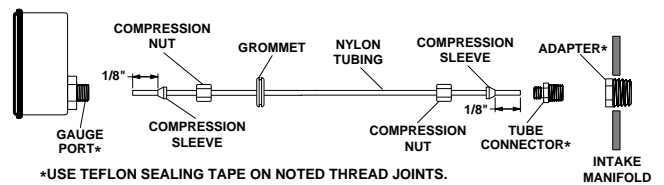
Boost/Vacuum Gauge - Intake Manifold Connection
